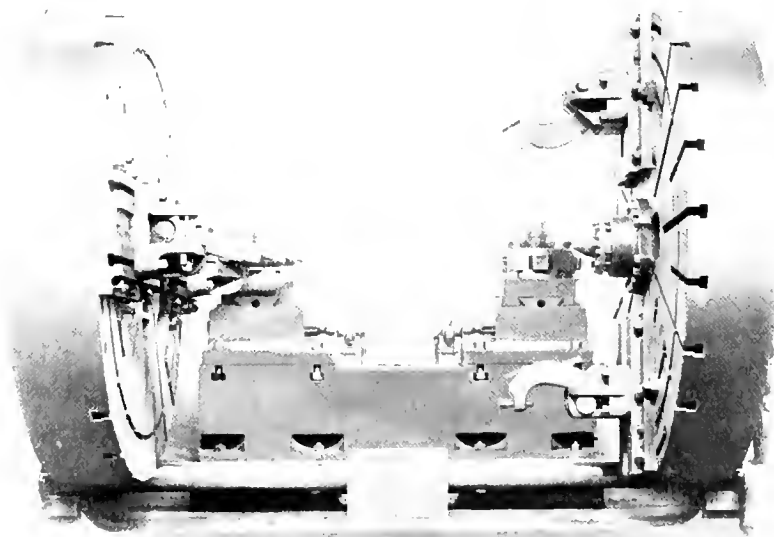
View of the Double Face-plates showing the Floating Drivers.
